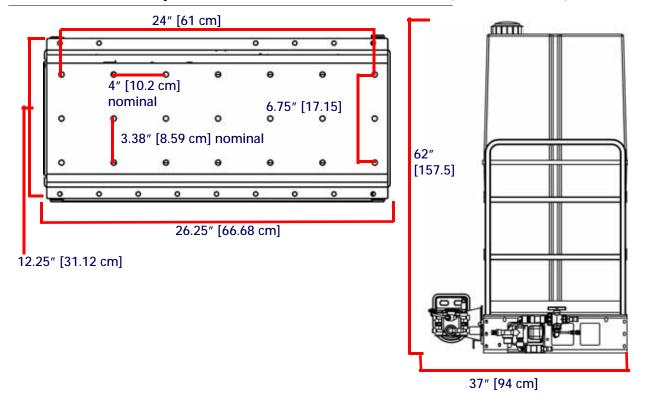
50 Gallon Injection Module Platform and Tank Dimensions (P/N 117-0175-035)
